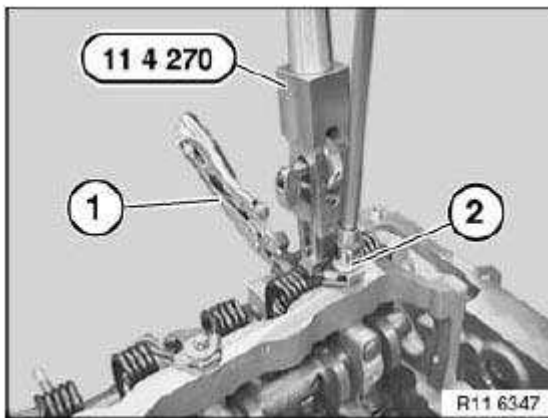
Torsion Spring Screw And Special Tool (11 4 270)
